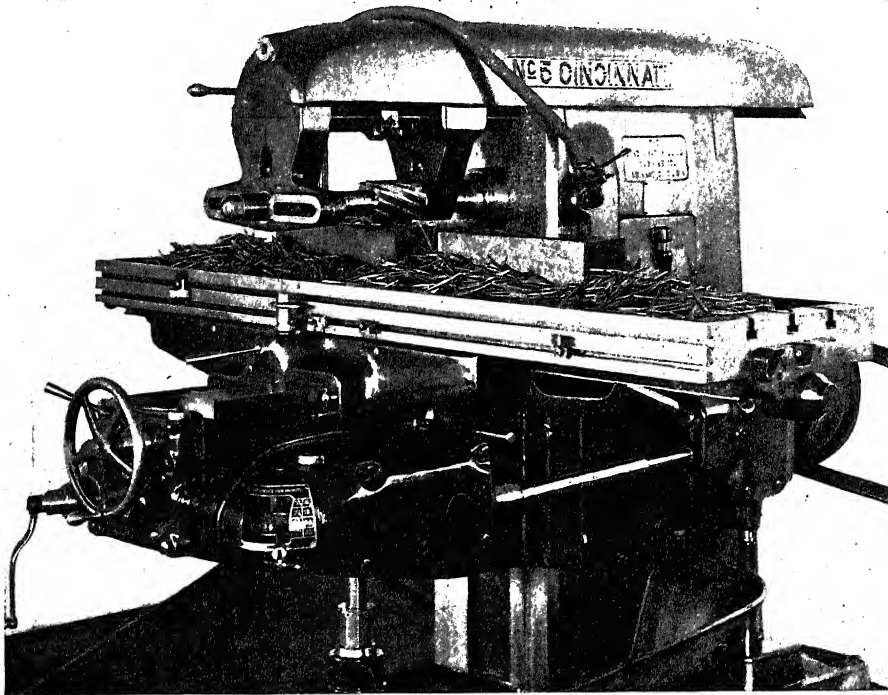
Slab Milling on a Plain High-power Cincinnati Machine. Material Steel, width of cut 5 in., depth  $\frac{1}{2}$  in., feed 19 in. per minute. Material removed 24 c. in. per minute.
